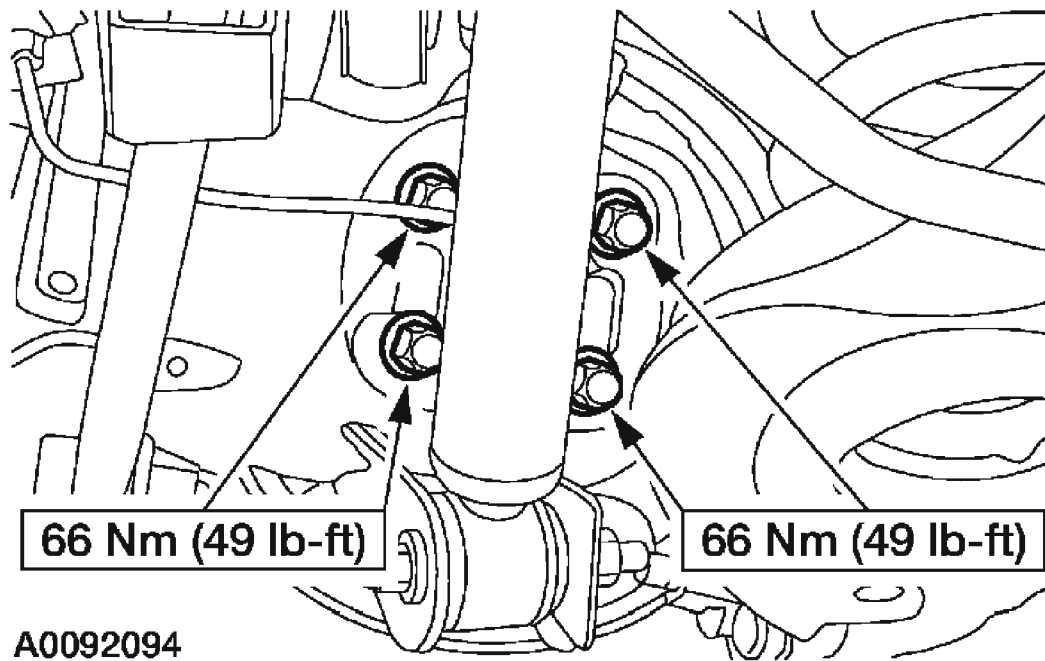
Removing Brake Drum And Wheel Spindle Assembly
